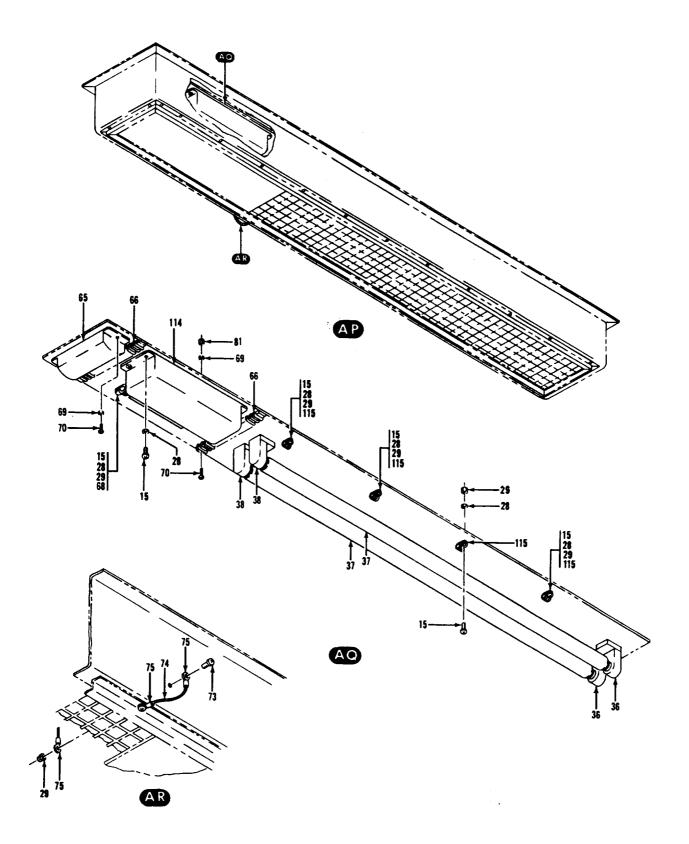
Electrical Equipment Installation (Sheet 13 of 19)
